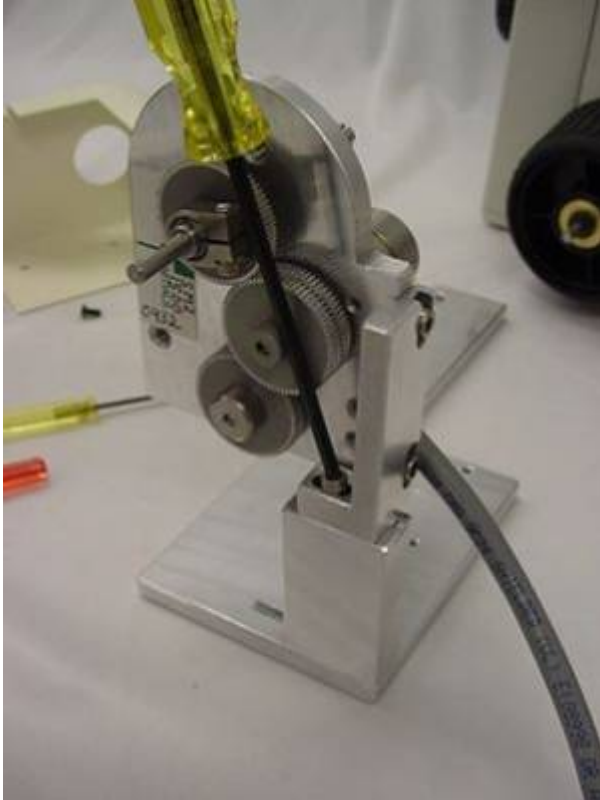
Removing Horizontal adjustment screw to remove Z-drive from base plate
